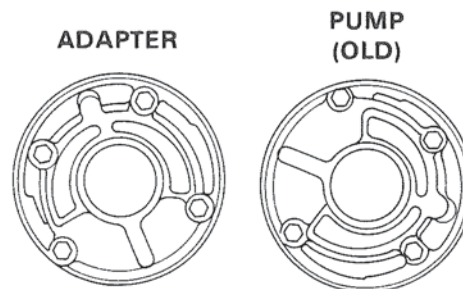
Orientation Markings for Old 71-1A60 Pump Assembly on 71-8B Adapter.
